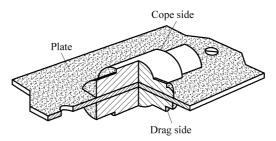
A typical metal match-plate pattern used in sand casting
